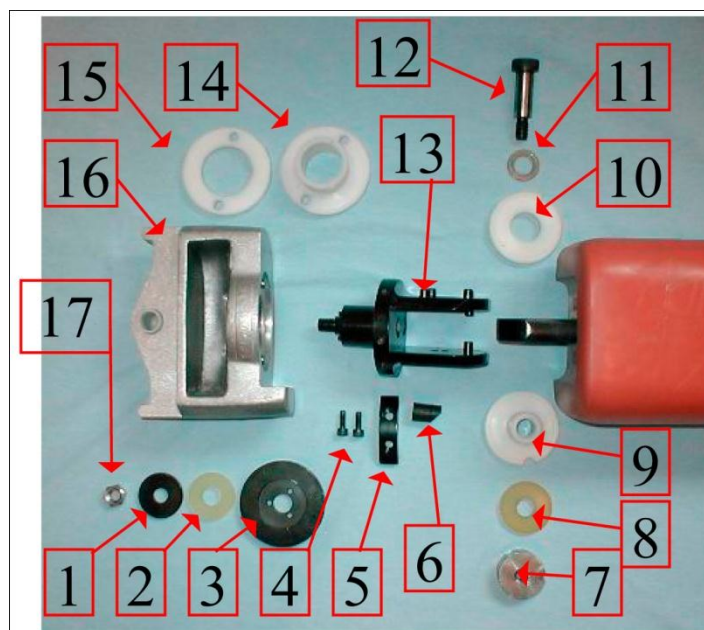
CLAVICLE AND SHOULDER YOKE, EXPLODED VIEW
